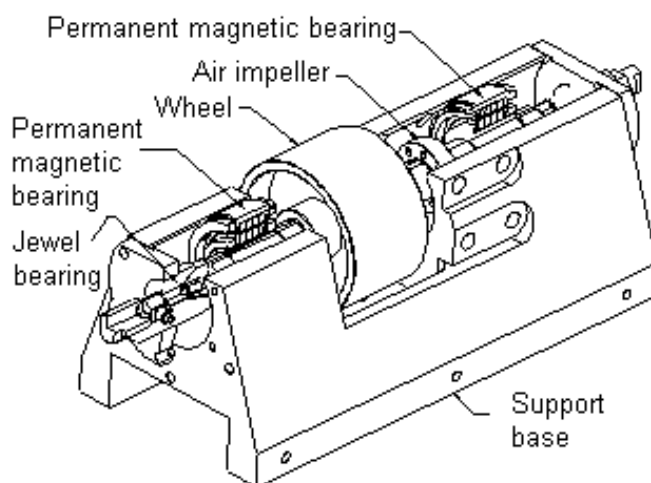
Schematic view of passive magnetic bearing rig. The permanent magnetic bearings and jewel bearing assembly at the near end were sectioned for clarity.
